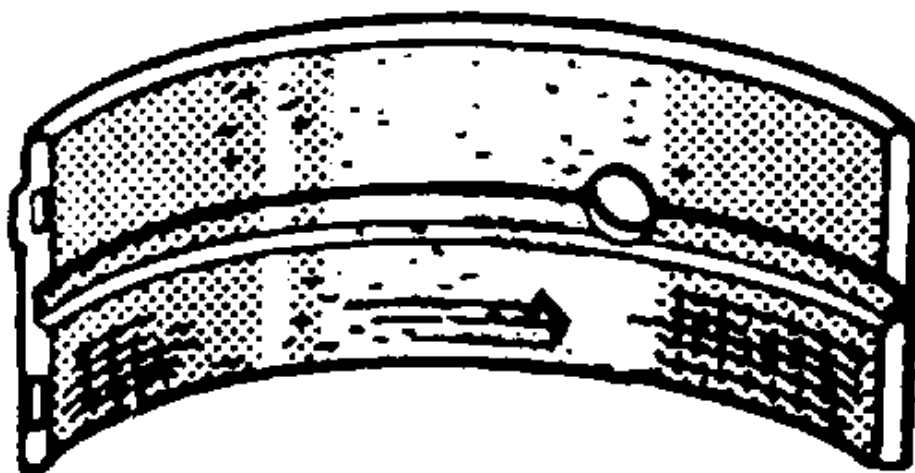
Identifying Connecting Rod Bearing Scoring Or Discoloration
